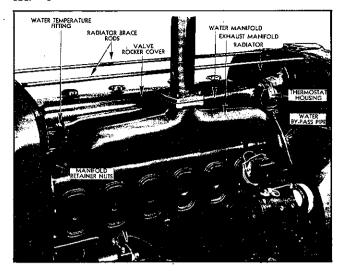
Water and Exhaust Manifold Connections— Radiator Installation.
